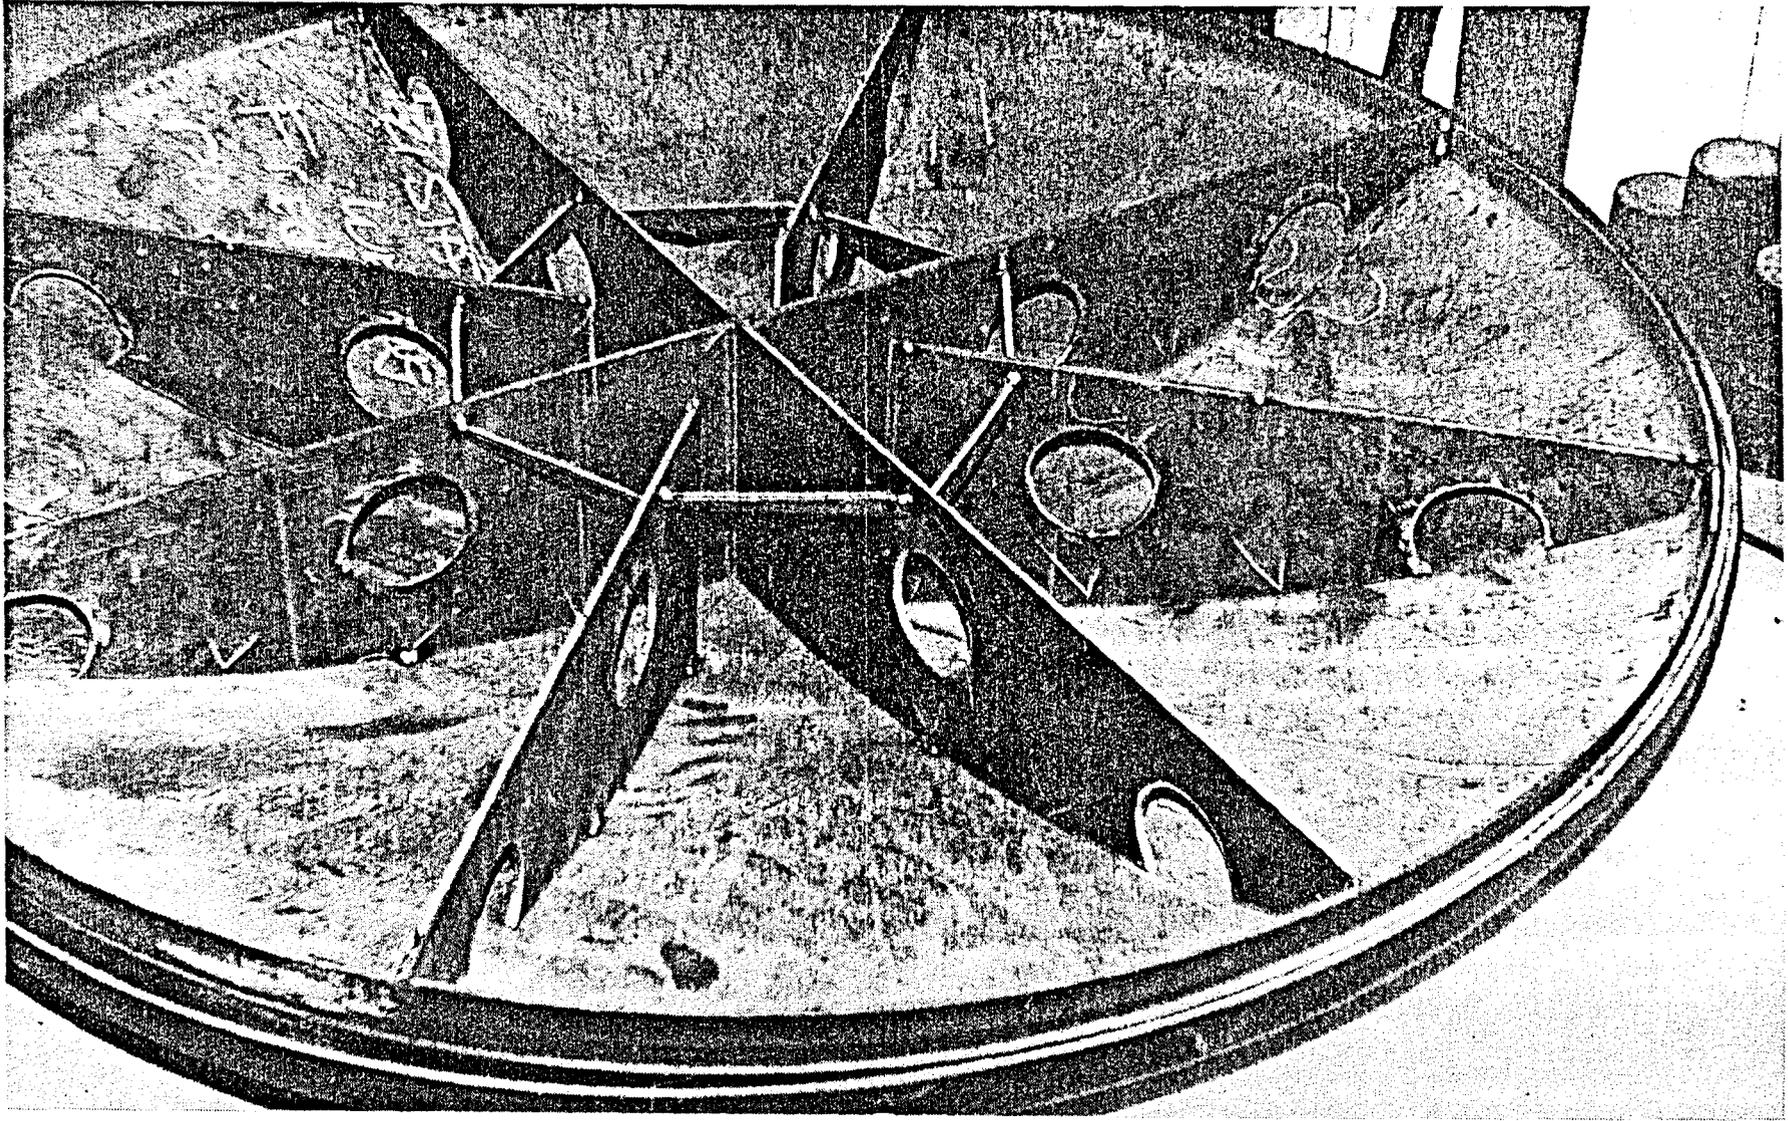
Saucer Skid Manufacture, Radiused Bottom Skid—In Process.
